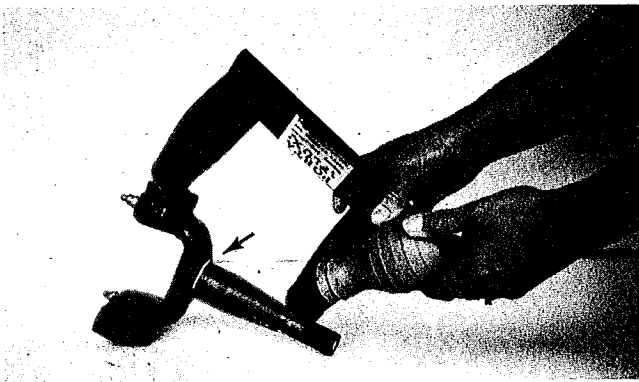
Parts are easy to check. Any cracks will show up as a white line.
